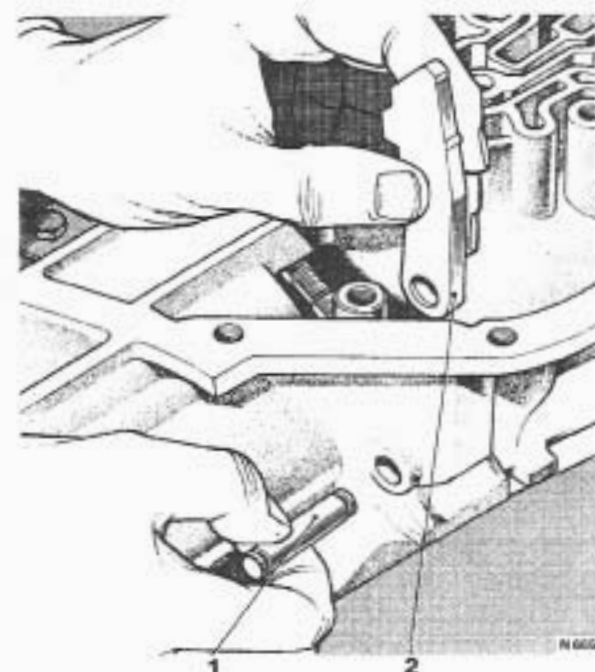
FITTING THE PARKING PAWL AND SHAFT
